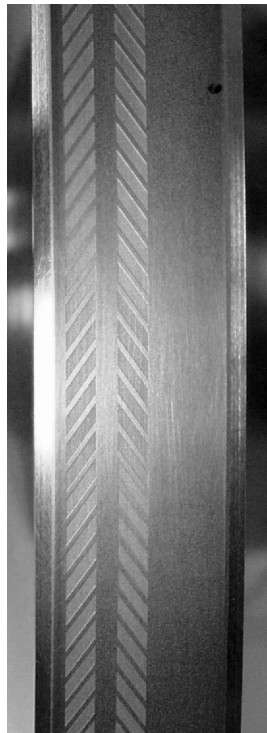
Herringbone grooves on NCFS test rotor, pretest.
